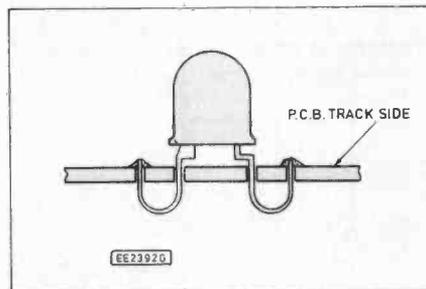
The leads of diodes D2 and D3 are passed through one set of holes and soldered to adjacent pads, see Fig. 5.
